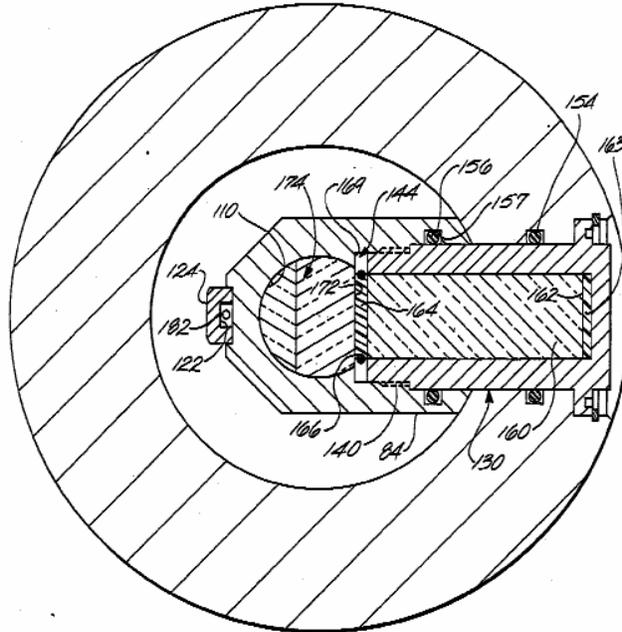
is a cross-sectional view taken through lower scintillator 52. Referring to this figure, the Examiner explained that
